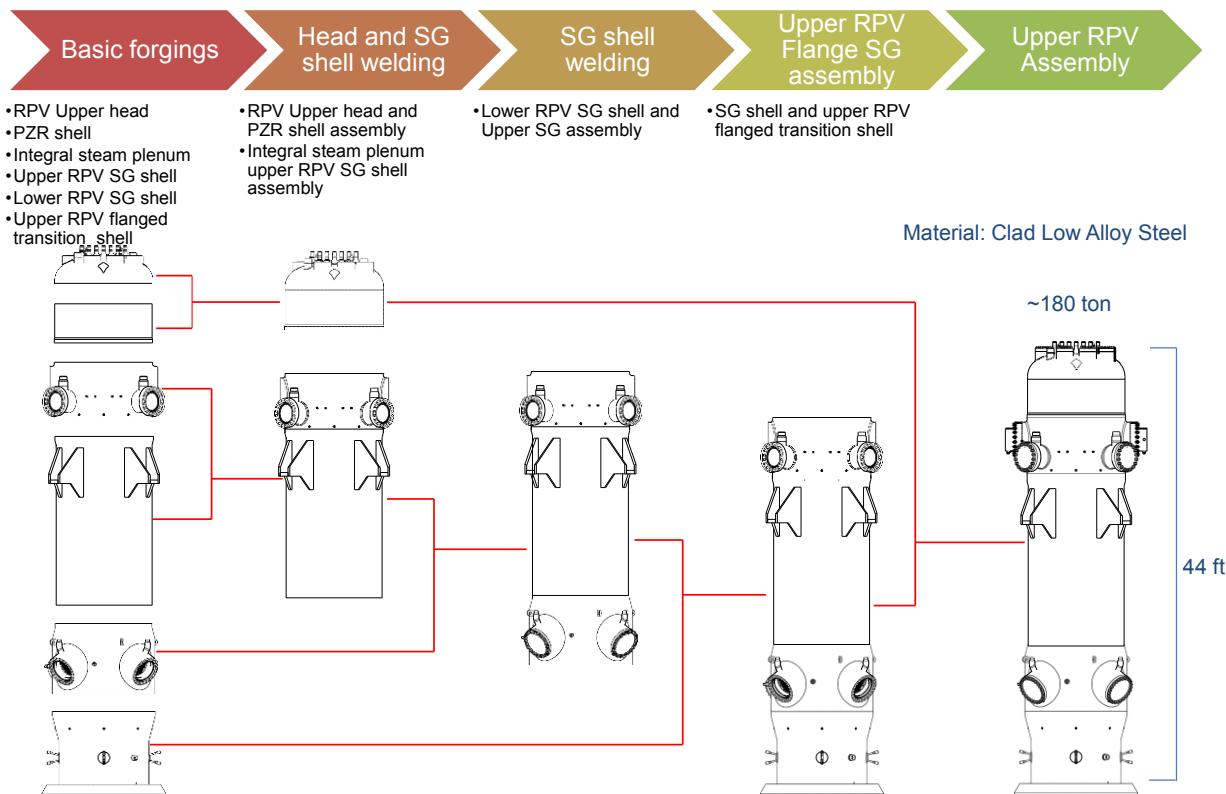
Upper Reactor Pressure Vessel Assembly
